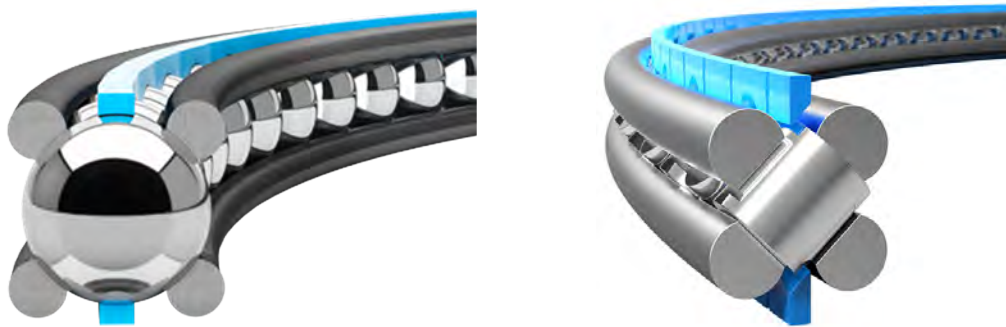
Four-point contact wire race slewing bearing (left) and crossed-roller wire race slewing bearing (right) [41].
